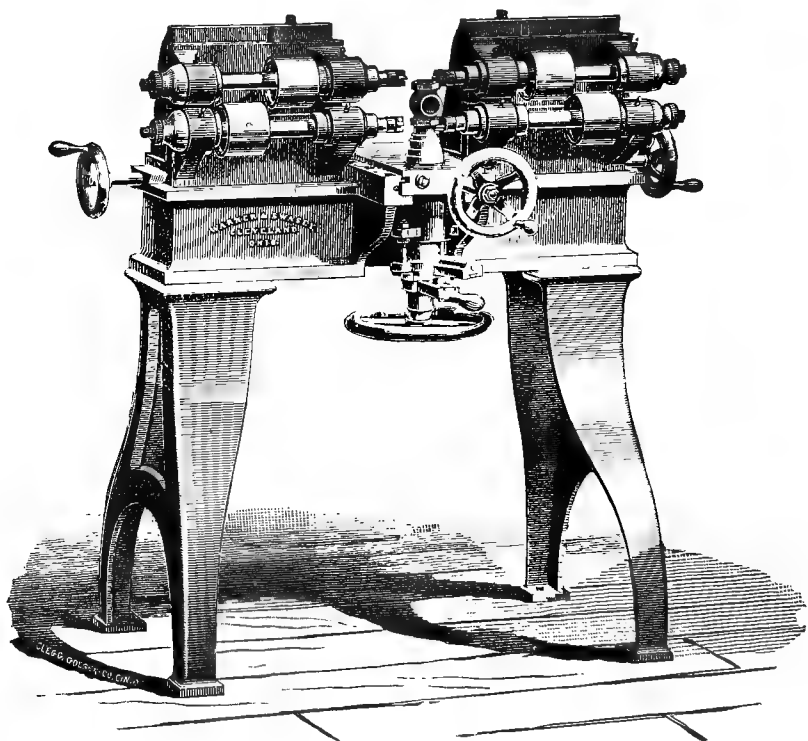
Four spindle valve milling machine; Warner & Swasey.
